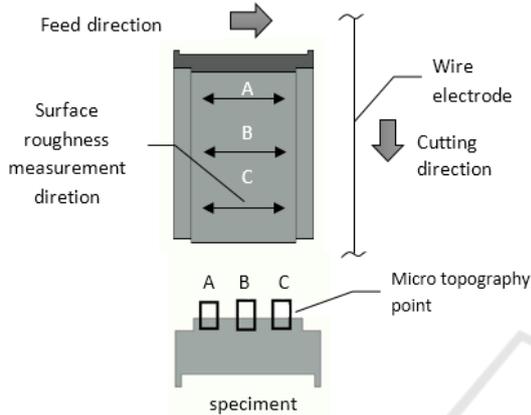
Cutting direction scheme and surface roughness measurement on specimen.
